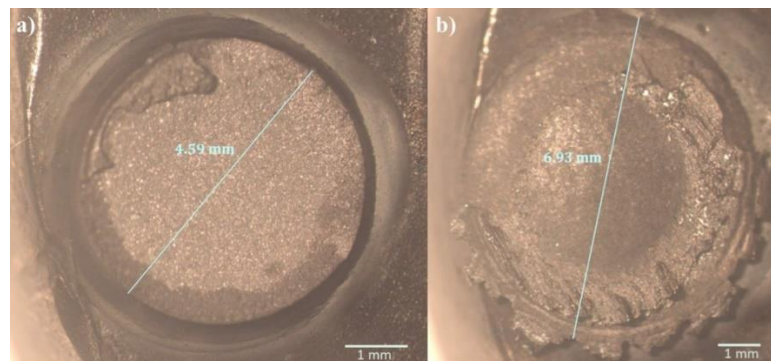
Weld nuggets macrographs: a) soft welding mode; b) hard welding mode.
